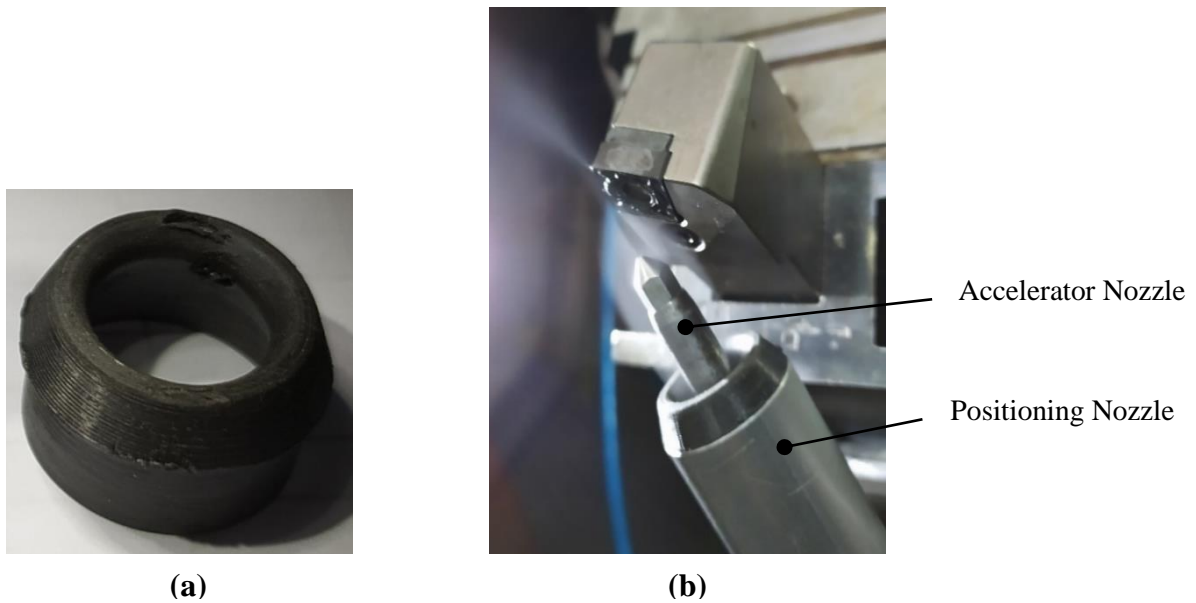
(a) Flat-wide nozzle Tip and (b) uACF nozzle components and position of cutting tool-uACF system
